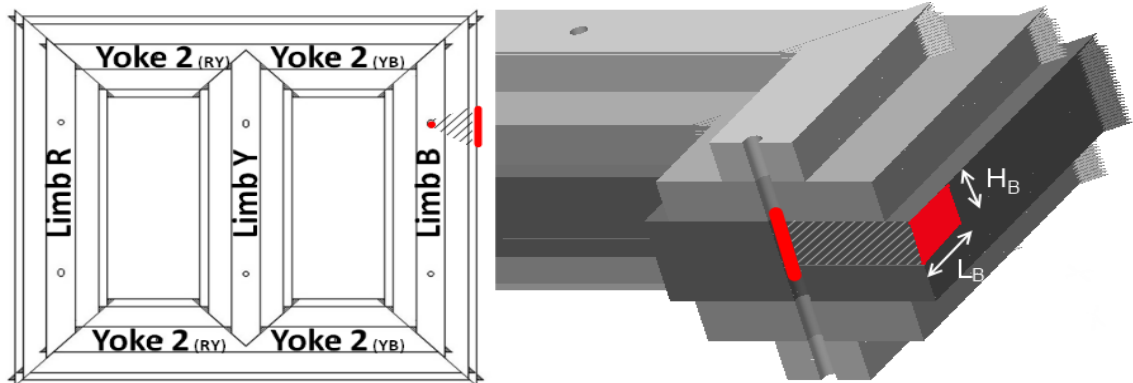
Schematic of placement of burrs inside the pin guide hole with burrs marked in red and approximate regions affected by burrs stripped.
